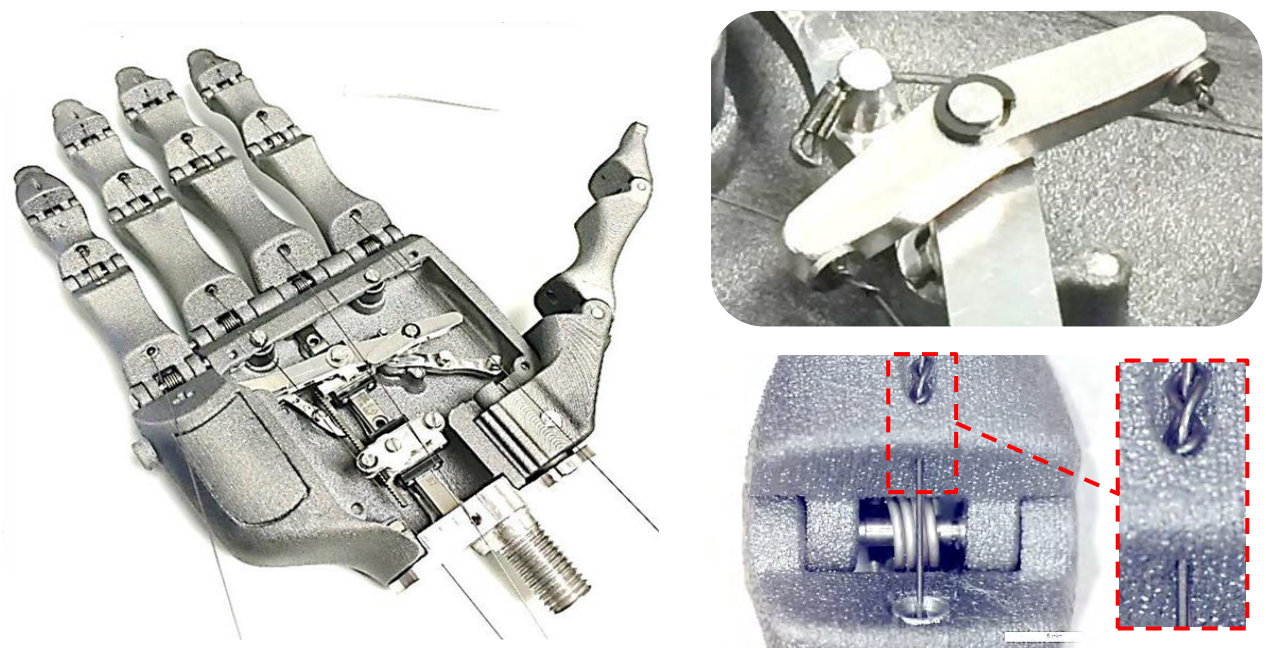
Attachment of actuating and routing wires/cables (Part 1).
